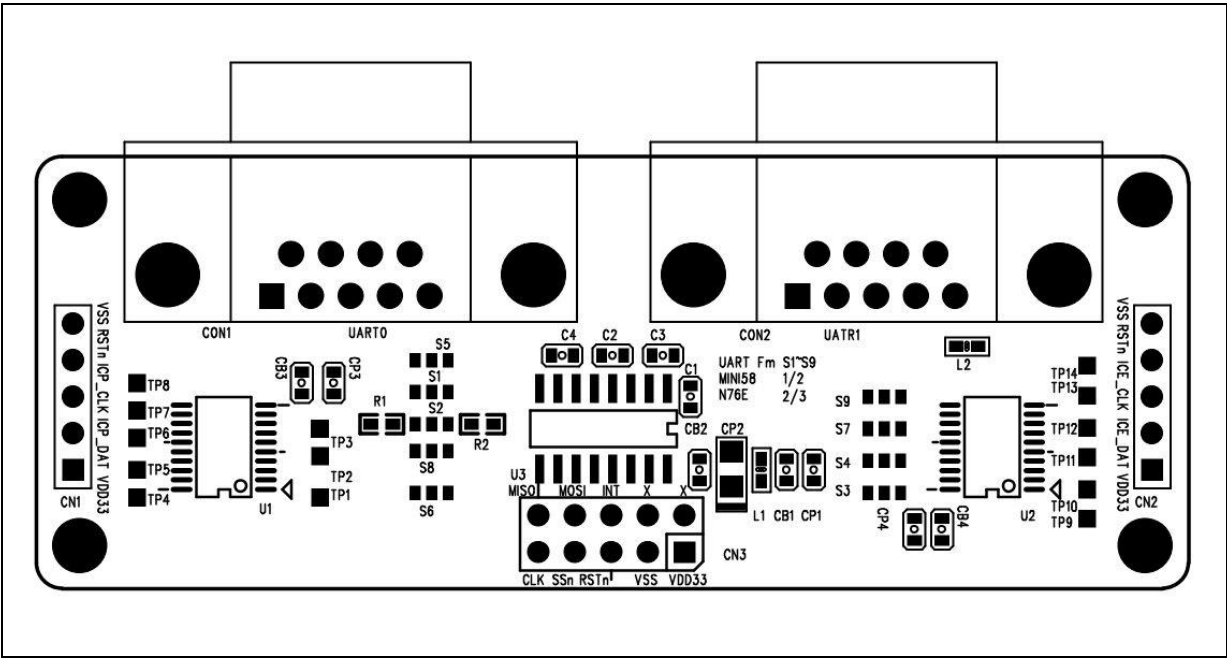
NuMaker-SPI2UART(B) PCB Placement (Front)
